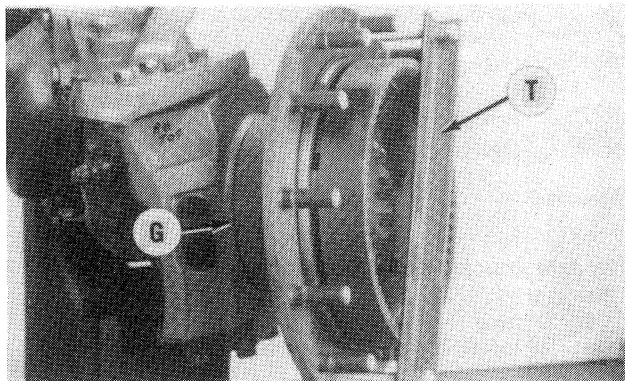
A fabricated clamping tool (T) is used to hold planetary ring gear and wheel hub together during installation of wheel hub onto knuckle-spindle. Ring gear retainer should be tightened until gap (G) between wheel hub and knuckle-spindle is about 1/8 inch (3 mm).
